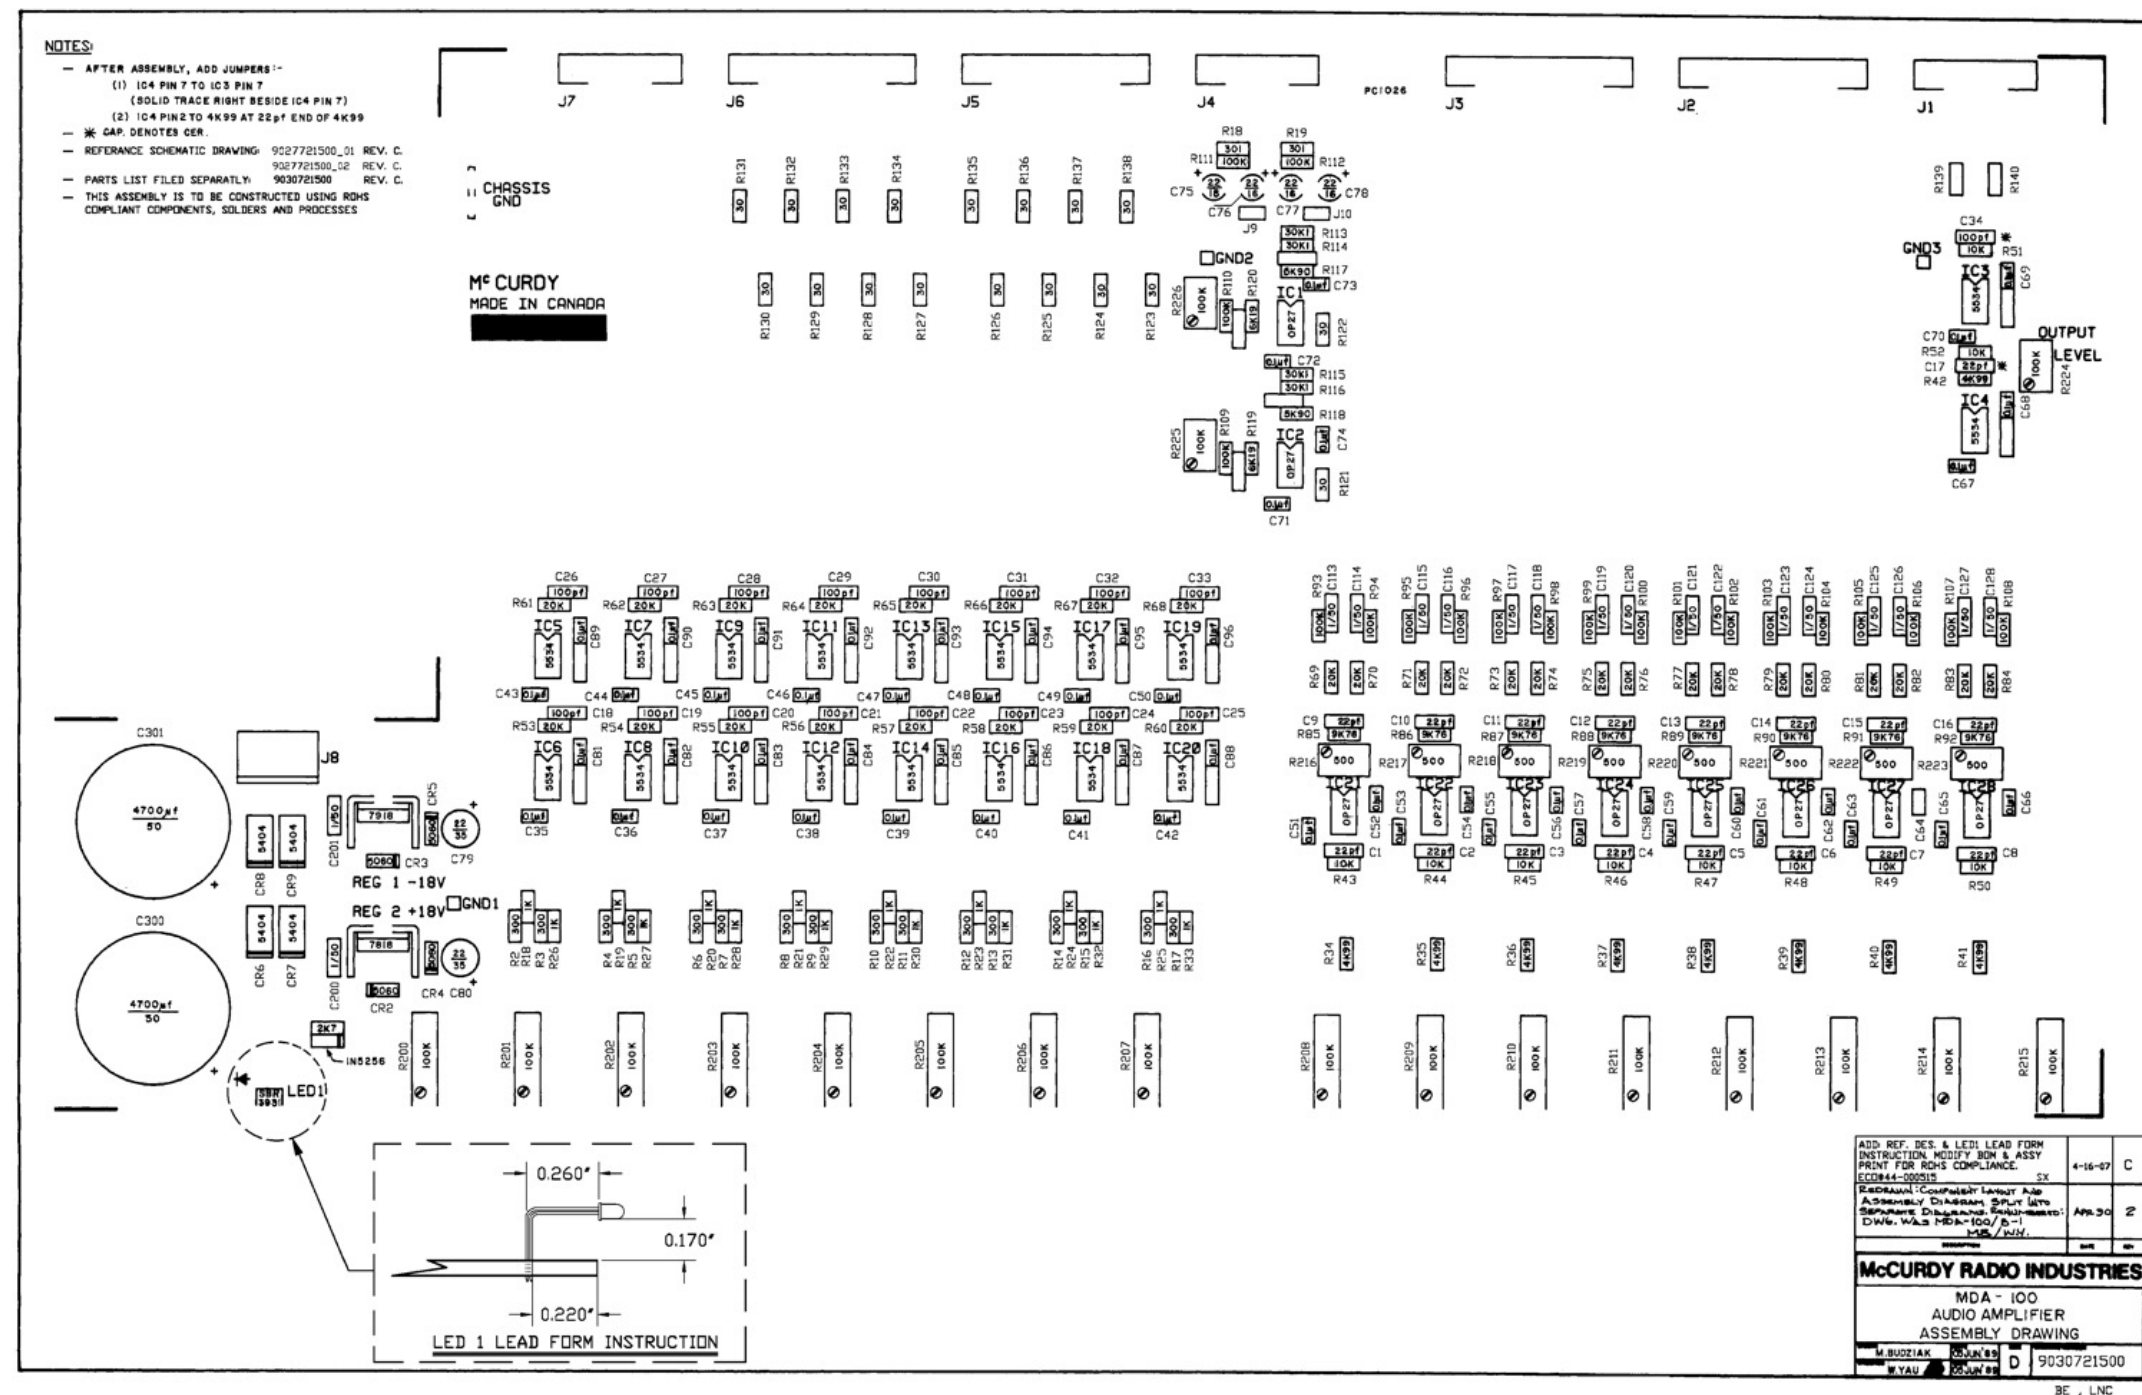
MDA-100 Audio Amplifier Assembly Drawing
